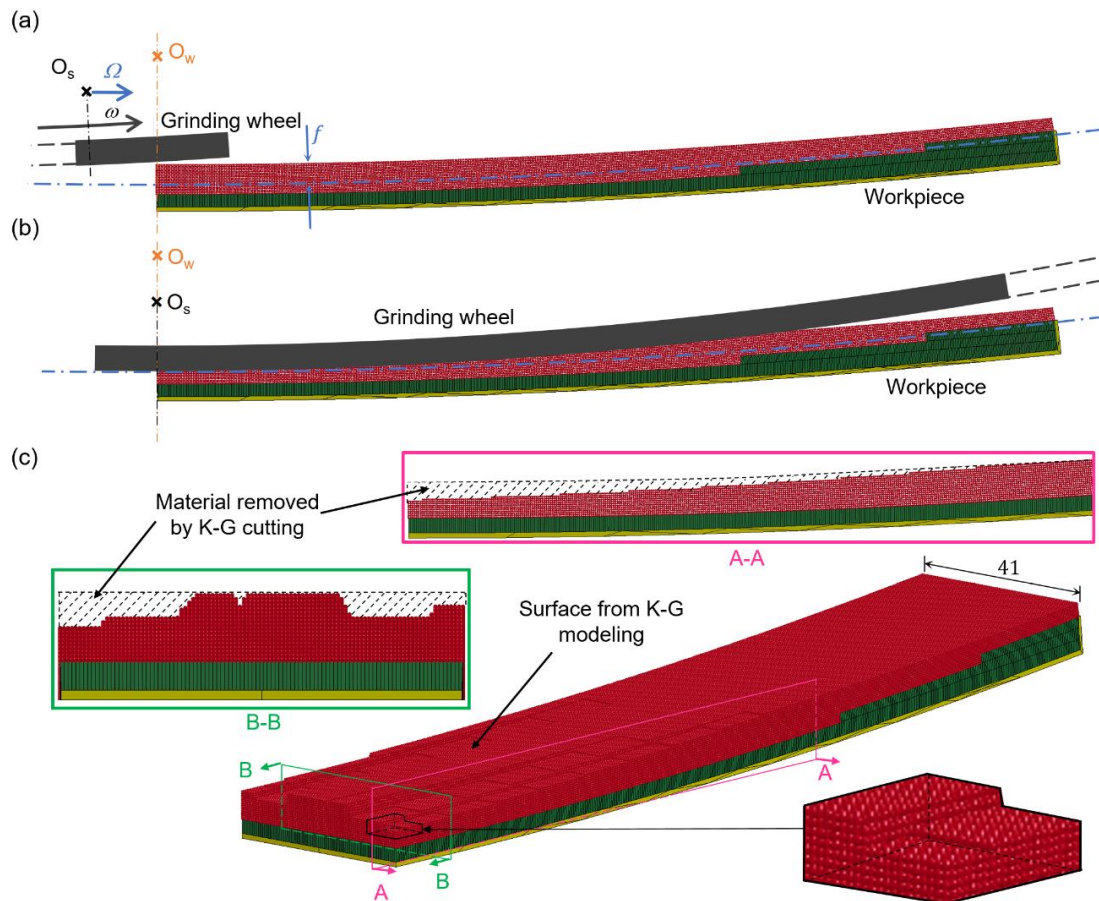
Kinematic-geometrical cutting of the workpiece: (a) starting and (b) ending configurations and (c) surface after K-G cutting.
